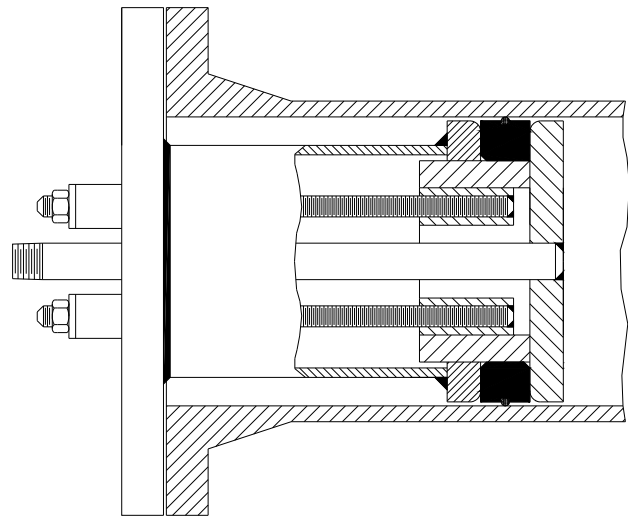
Flange Test Plugs Installed as Isolation Plug.
